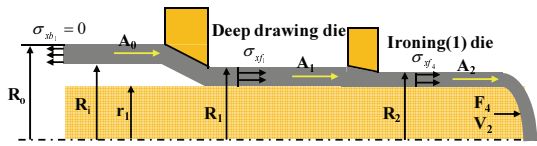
Schematic drawing for obtaining forming energy of deep drawing and ironing (1) process
